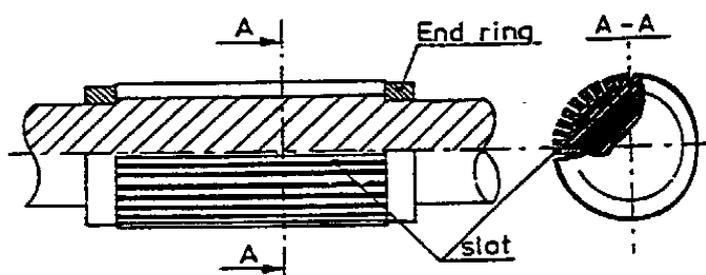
Solid Rotor Induction Machine with Cage.
